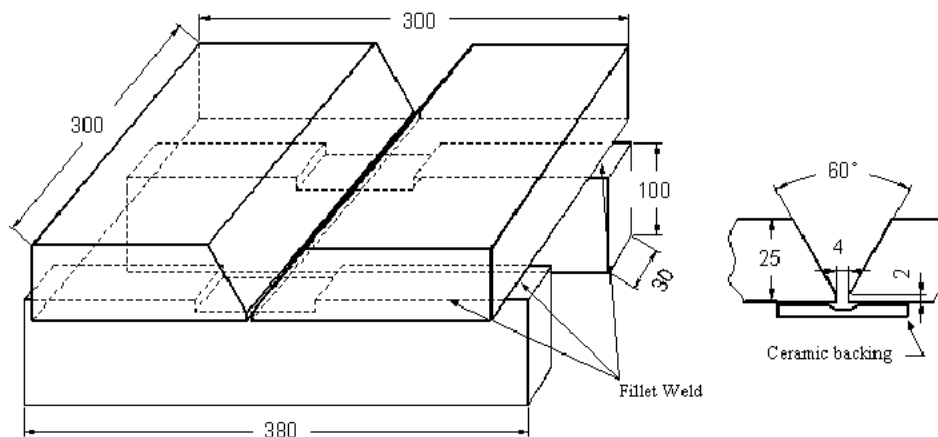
Specimen geometry for evaluating the cold crack susceptibility of multipass weld metal.
